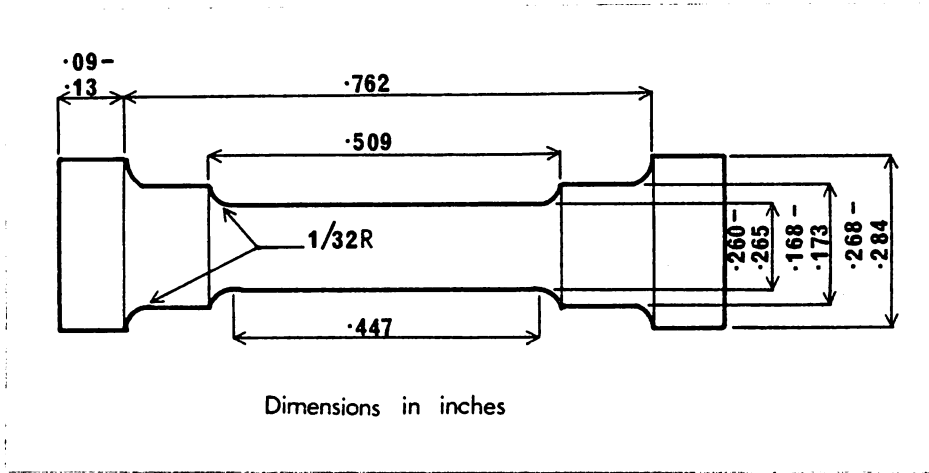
The Hounsfield No. 11 tensile test specimen.
